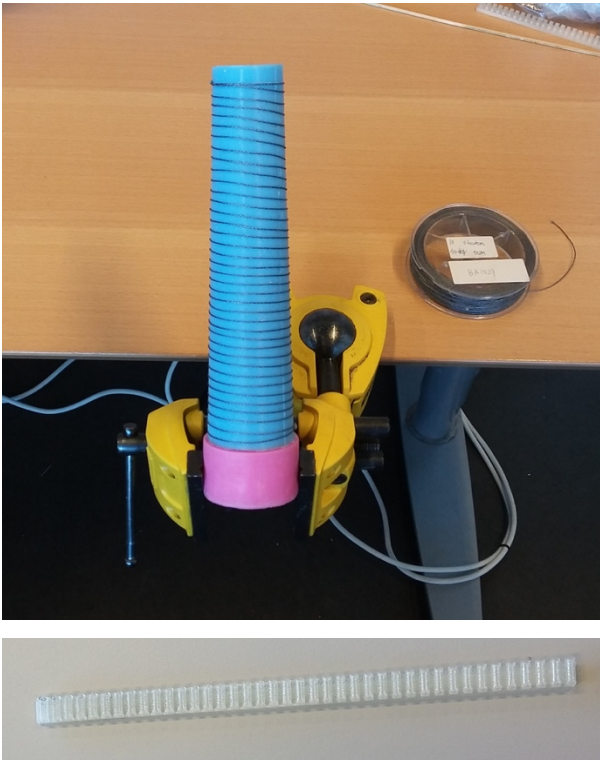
After the tentacle with the inner mold has been removed from the outer mold, the end of the inner mold is fixed in a clamp. Braided fishing line is wrapped around the tentacle from the bottom. A 3d printed guide with equidistant ridges (lower image) is used to position the windings with an equal distance to each other. The fishing line is secured at the top with a knot and epoxy glue.
